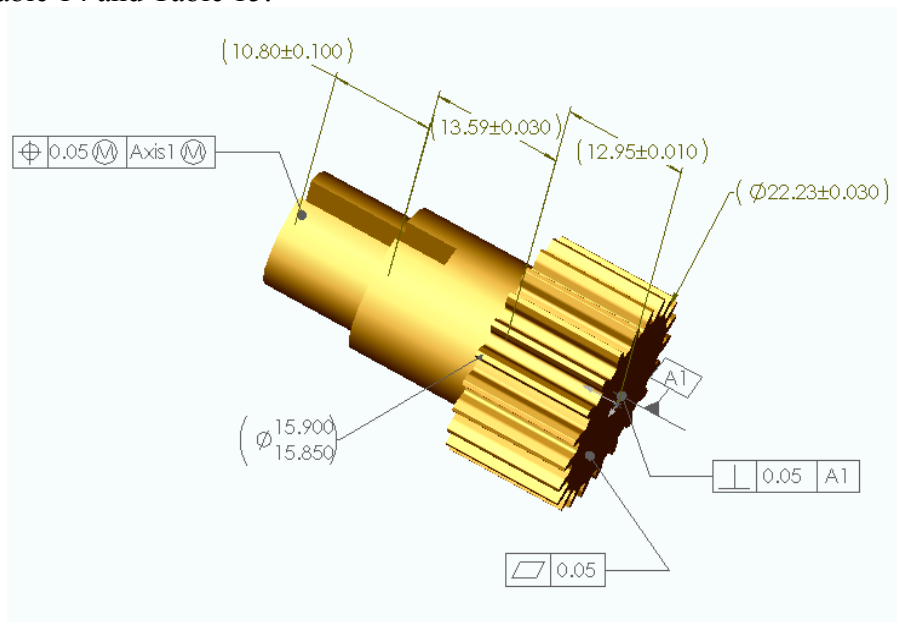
Geometrical and dimensional tolerancing on sun gear (Art7)
